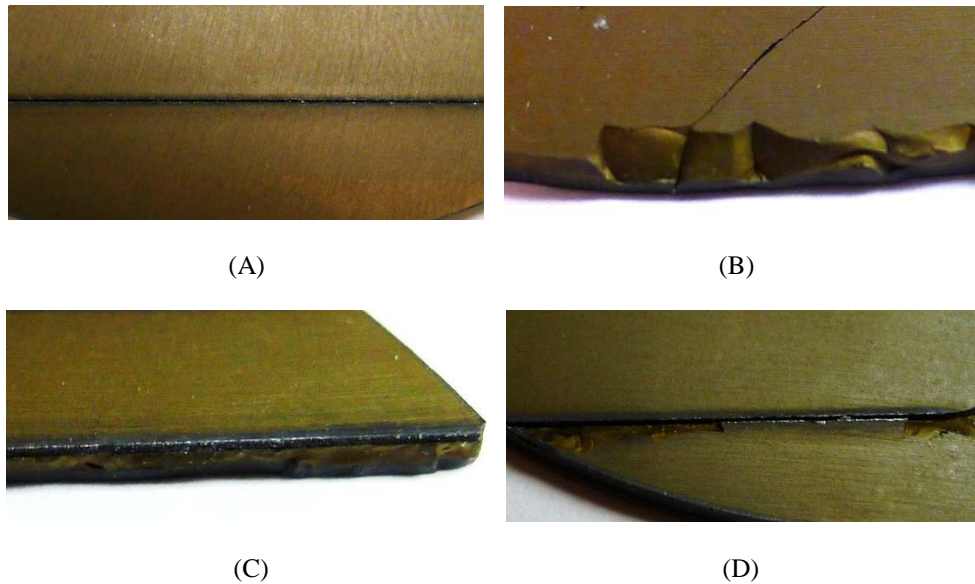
(A) Superficial scribing: single-pass cutting of PCBN/WC (B) Severe damage: high energy input for single-pass cutting (C) Through-cut: multi-passes defocused cutting (D) Less spalling cracks: multi-passes defocused cutting
